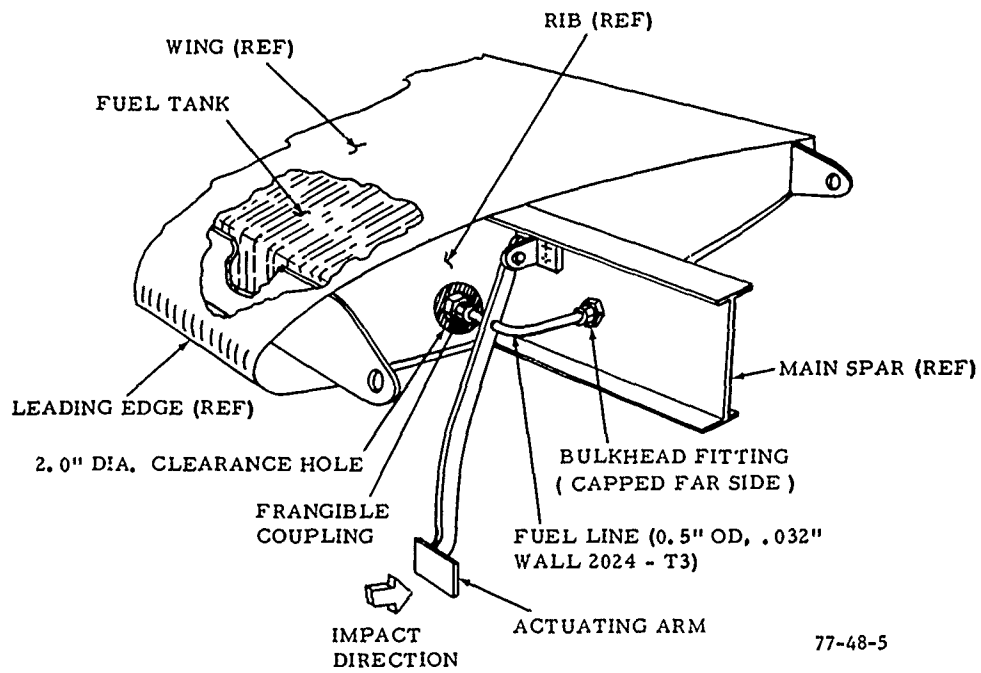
TYPICAL FRANGIBLE COUPLING INSTALLATION (WING ROOT)
